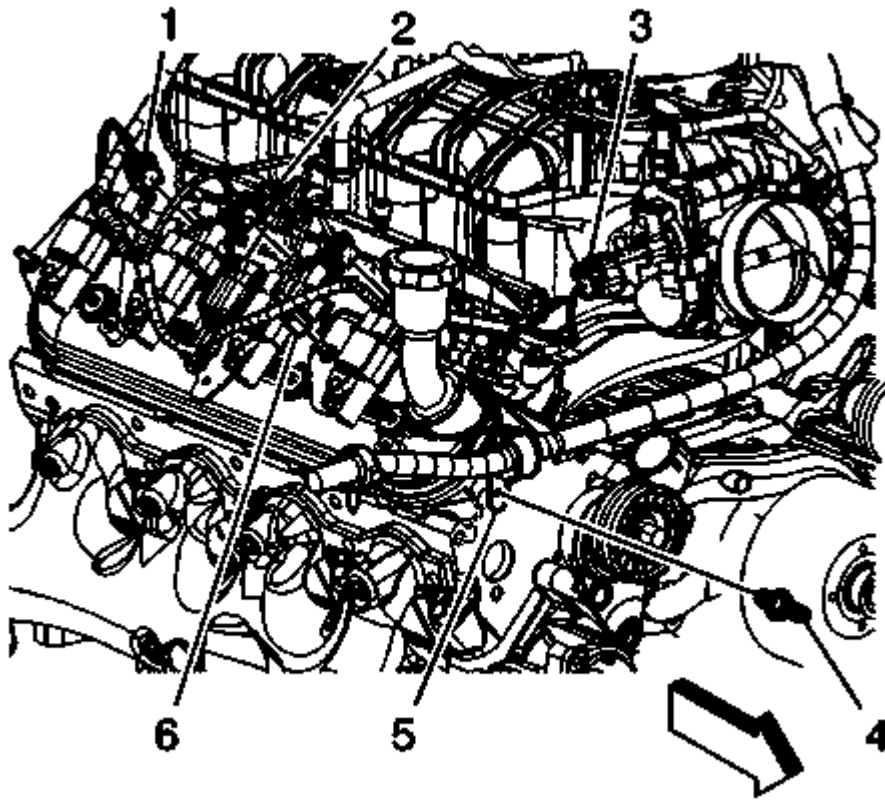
Right Cylinder Head Engine Harness Studs And Retainers
